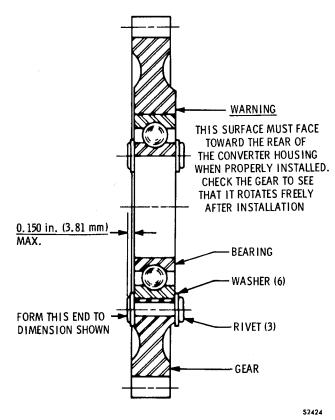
Accessory drive idler gear assembly and installation—cross section
